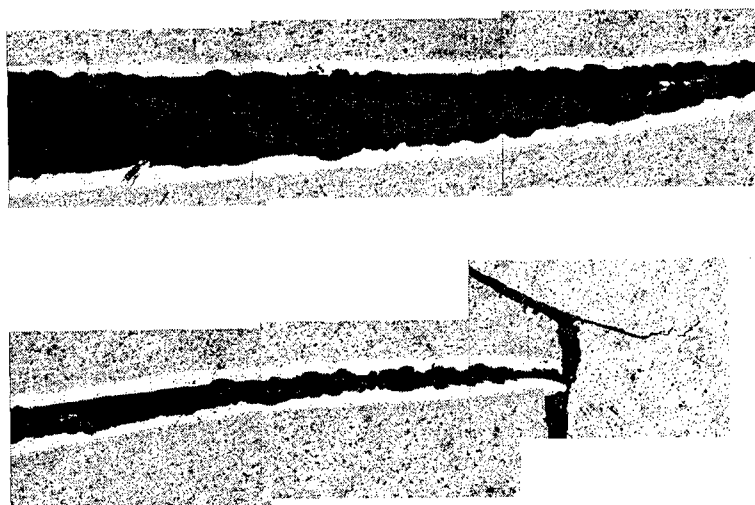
Montage of section through pillowed 727 splice showing corrosion in cladding and crack in rivet. Dark region contains corrosion product and adhesive.
